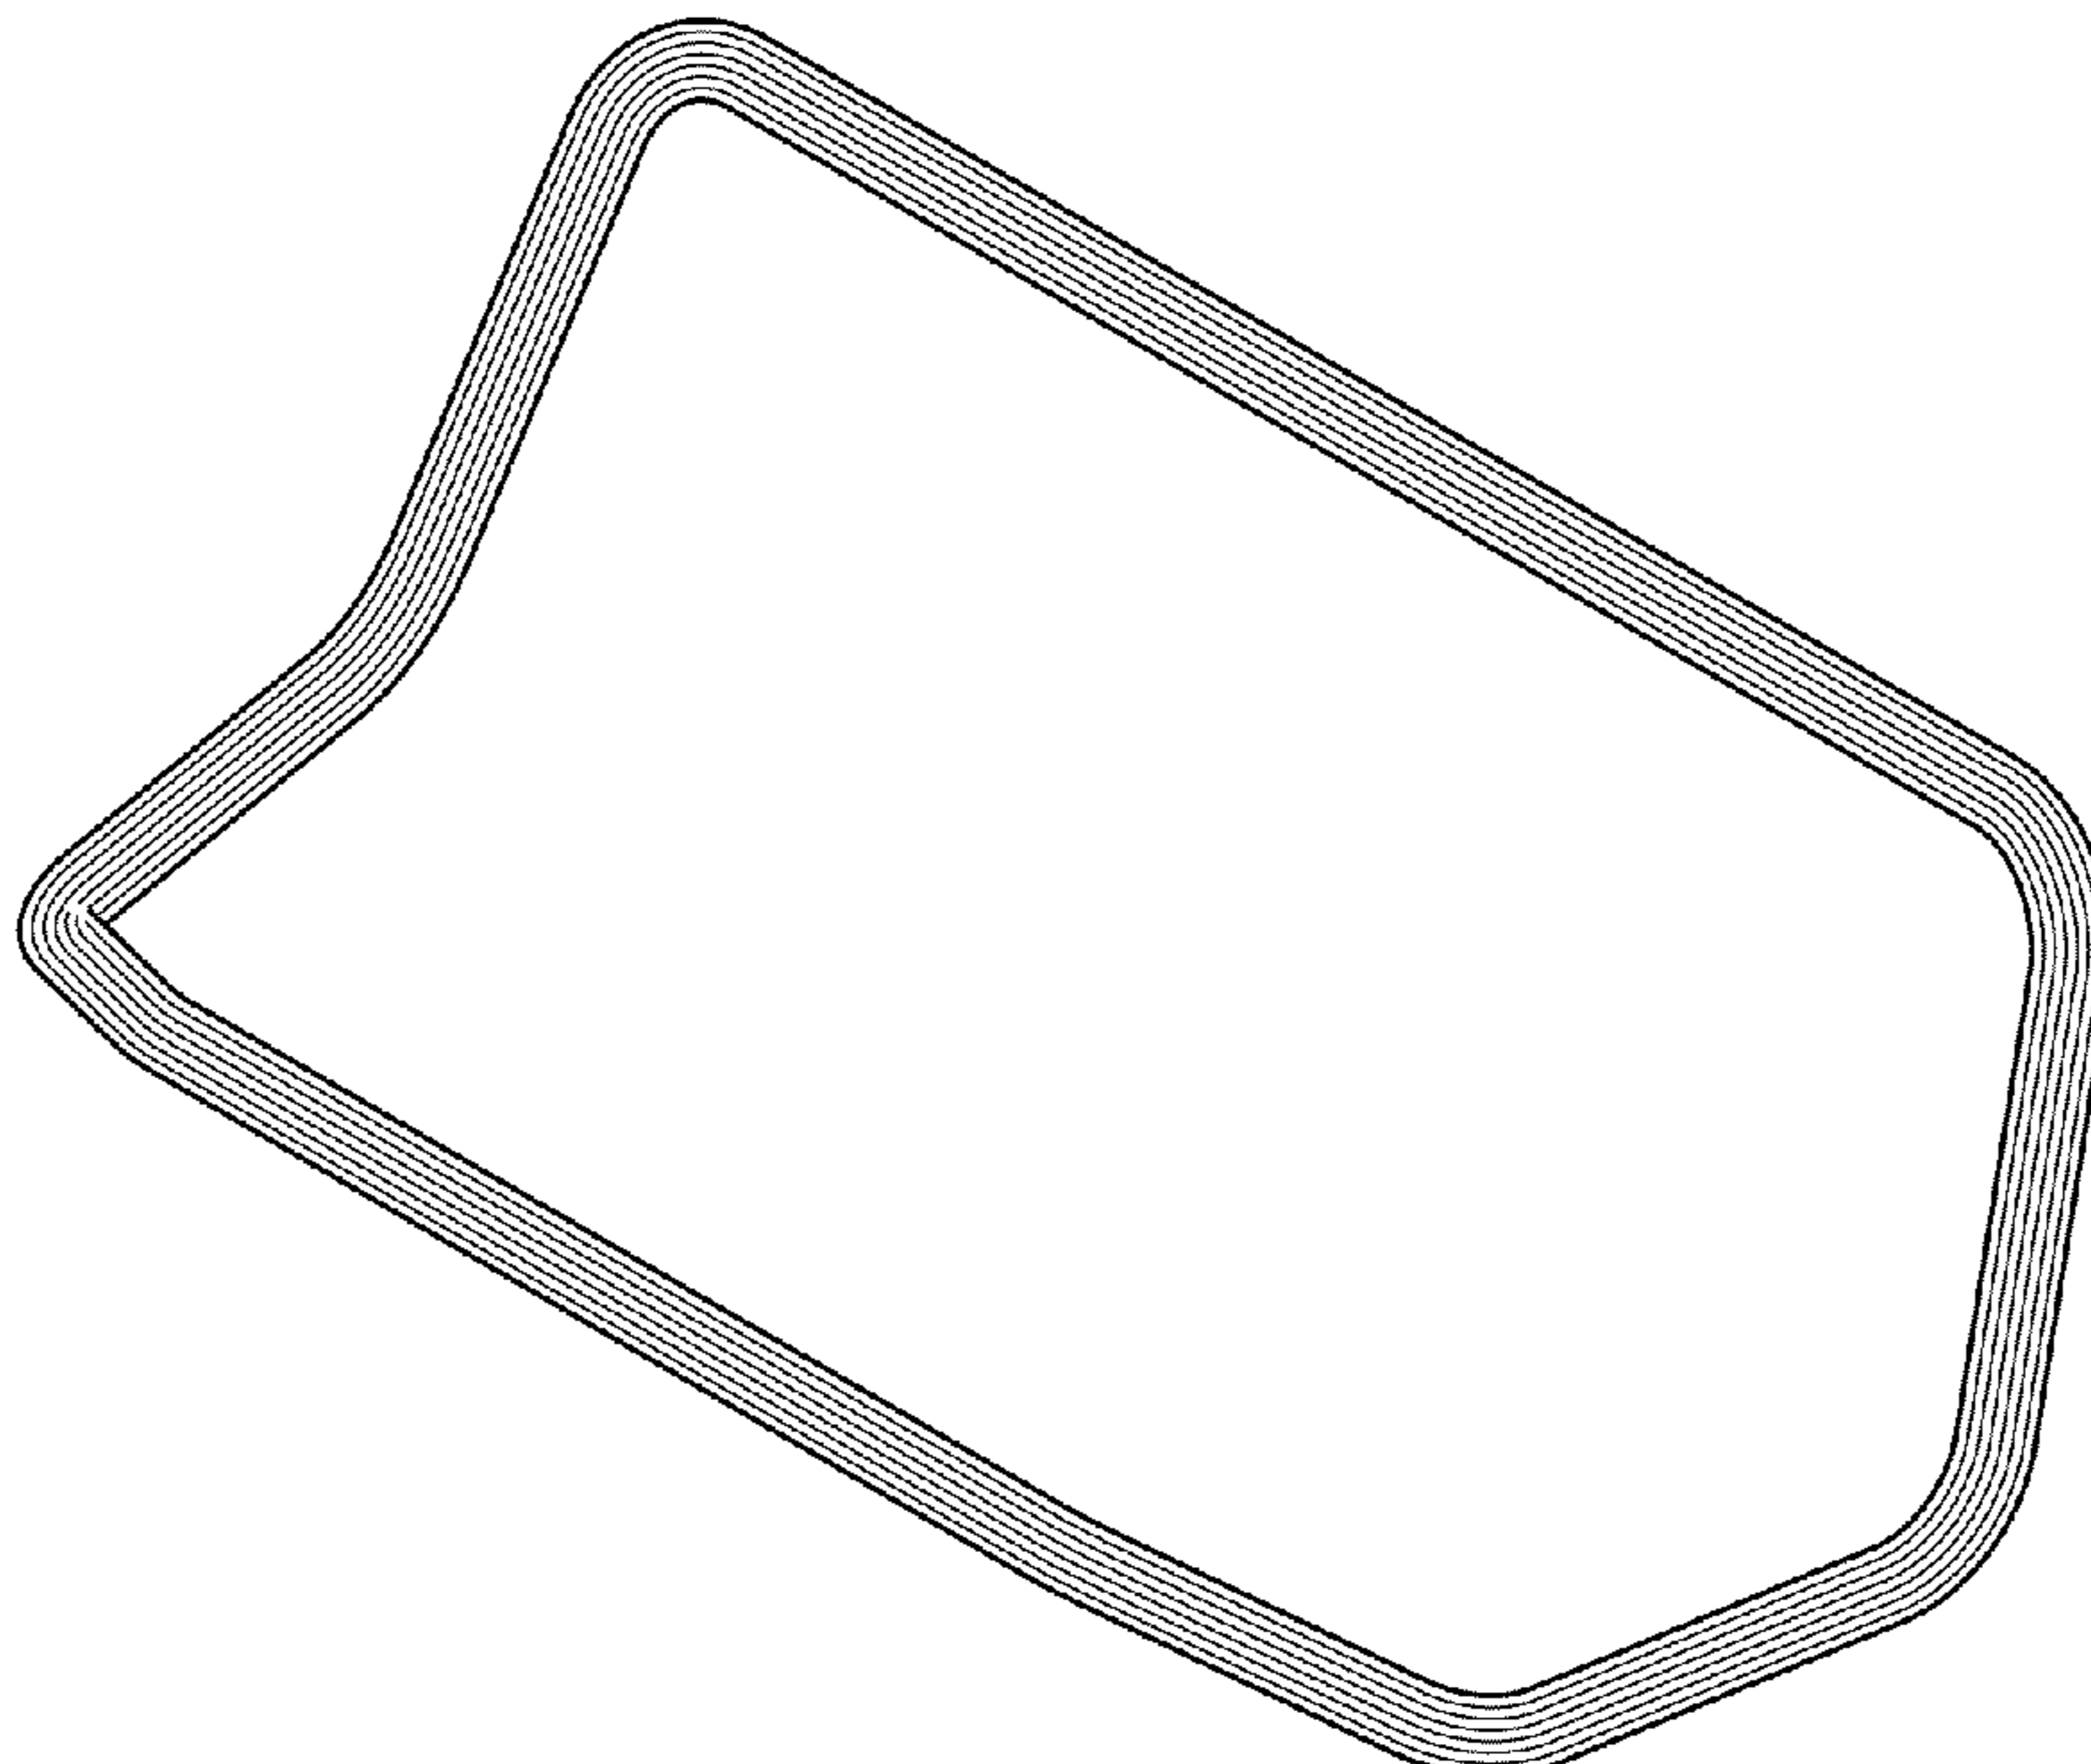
is a front perspective view of an electrical coil showing our new design;
